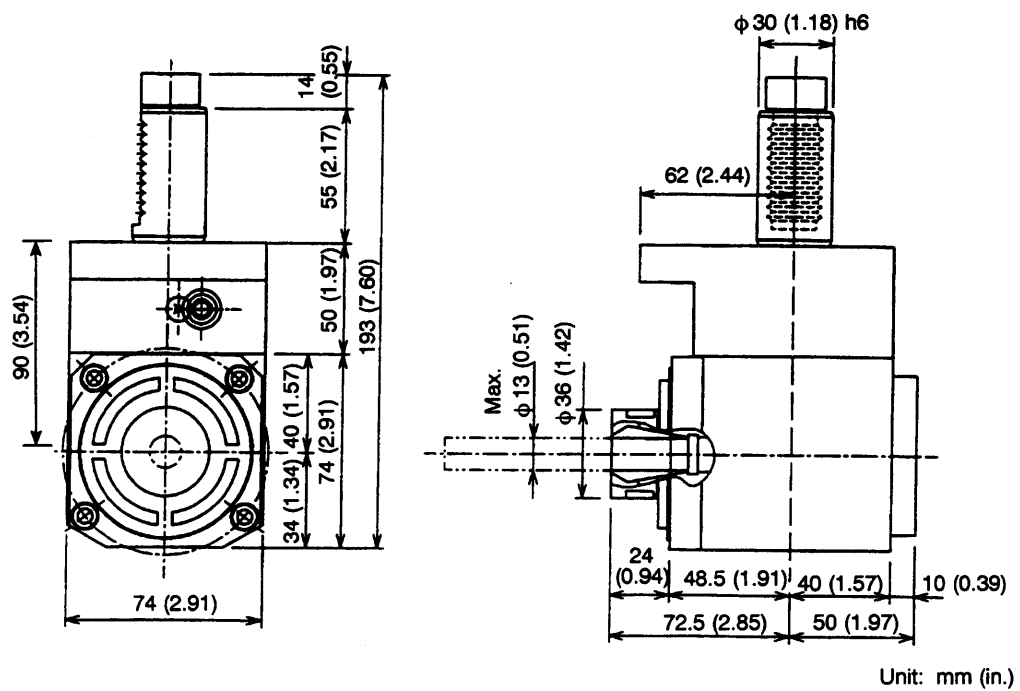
Face Drilling End Milling Toolholder Dimension (Main Spindle)
